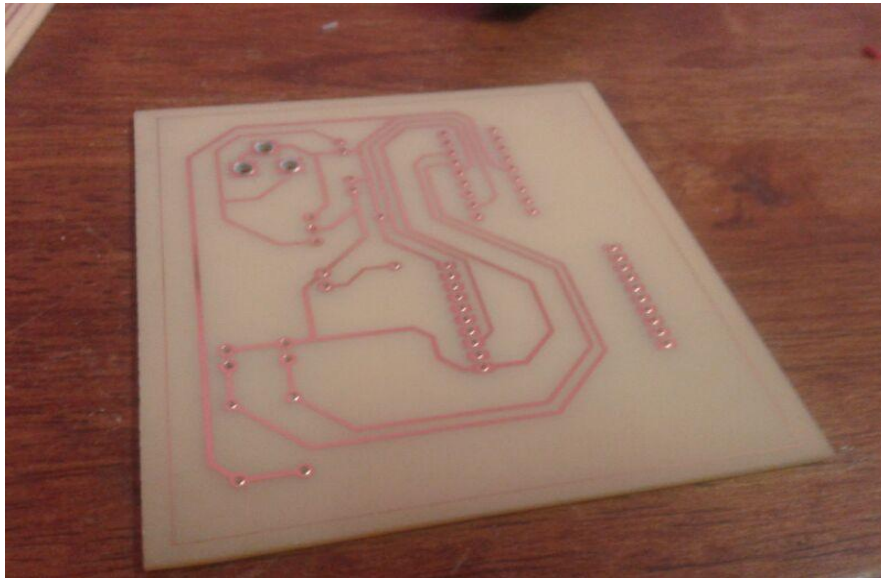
The Design Of The Printed Circuit For Transmitter On The PCB Board
